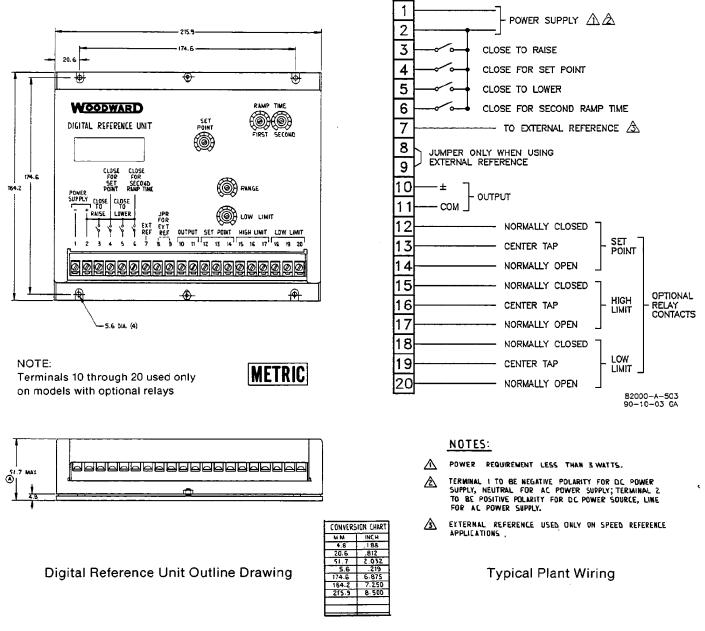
Plant Wiring Diagram and Outline Drawing
